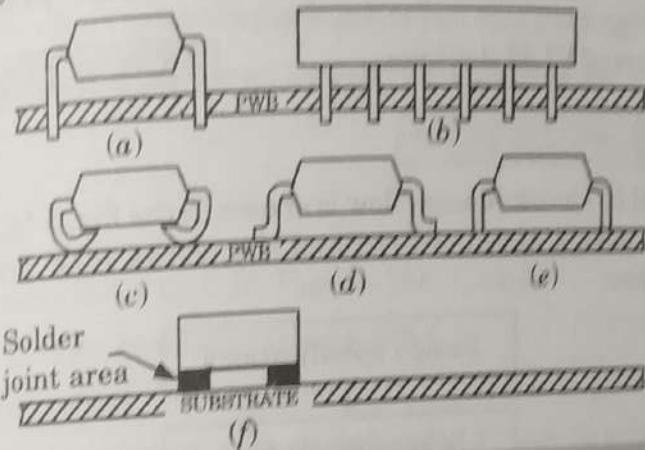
(a) Dual-in-line package (b) Pin-grid-array package
